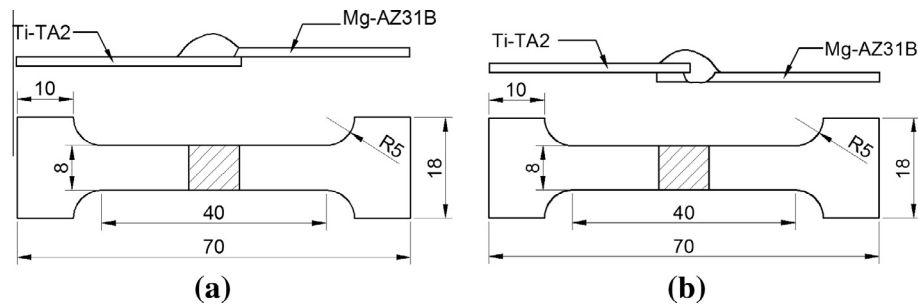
Specimens machined from the welded Mg AZ31–TA2 sheets: (a) Mg–Ti joint (top Mg sheet–bottom Ti sheet), and (b) Ti–Mg joint (top Ti sheet–bottom Mg sheet) (dimensions in mm).
